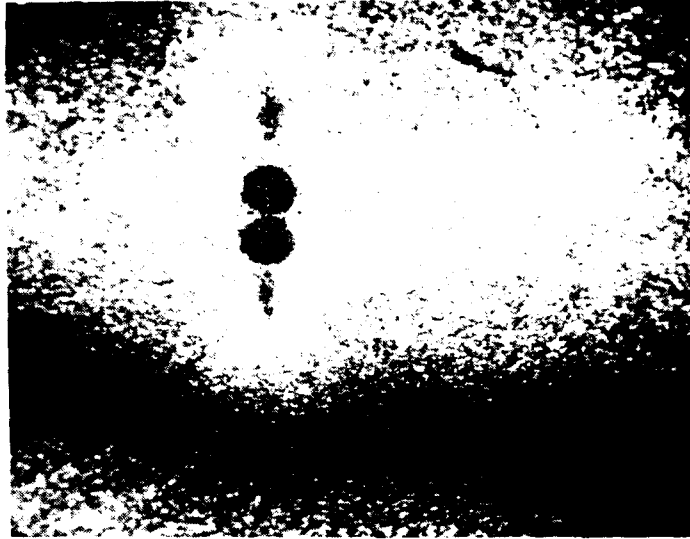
SMALL FATIGUE CRACKS AROUND PANEL RIVET HOLE. Y-VECTOR SHEAROGRAPH WITH CRACK MEASURING ABOUT 0.375 INCHES.
